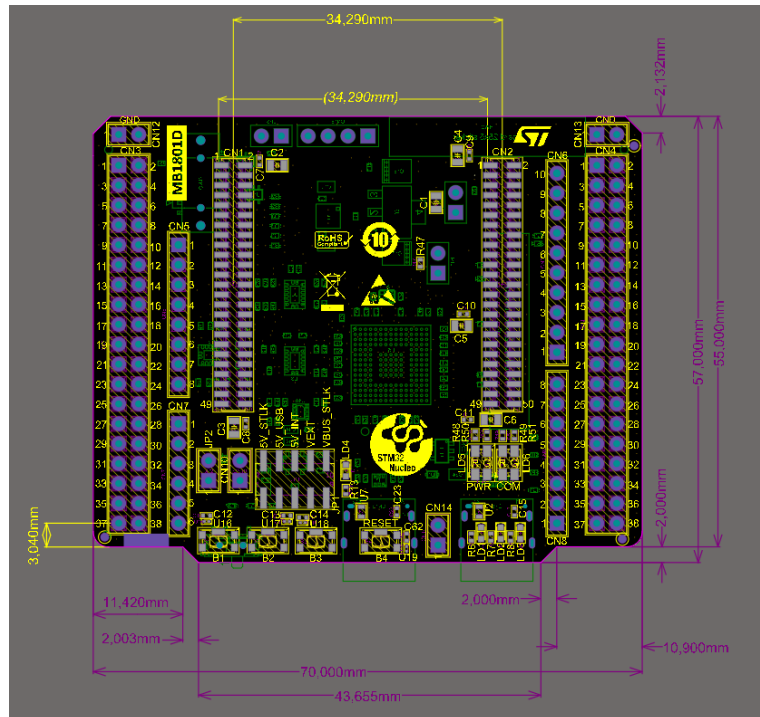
NUCLEO-WB07CC mechanical dimensions (in millimeters)
